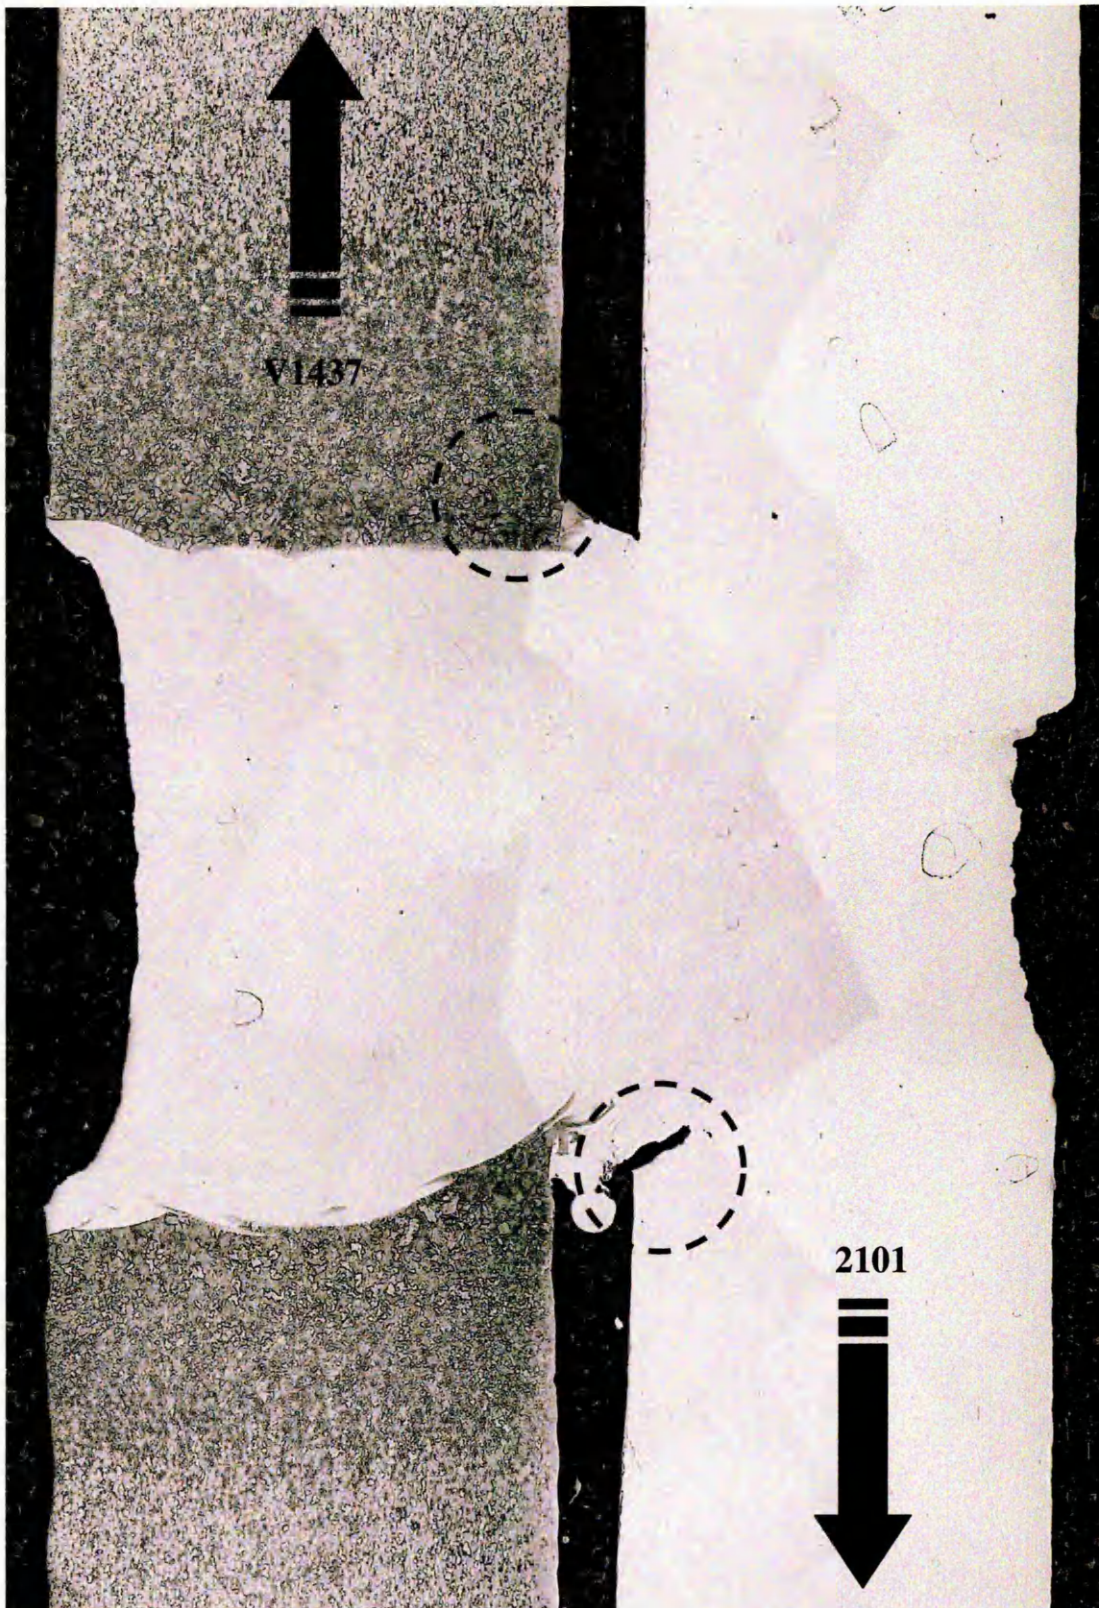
1.2mm V1437(top) – 1mm 2101 dissimilar metal lap joint showing fatigue cracks in both materials
